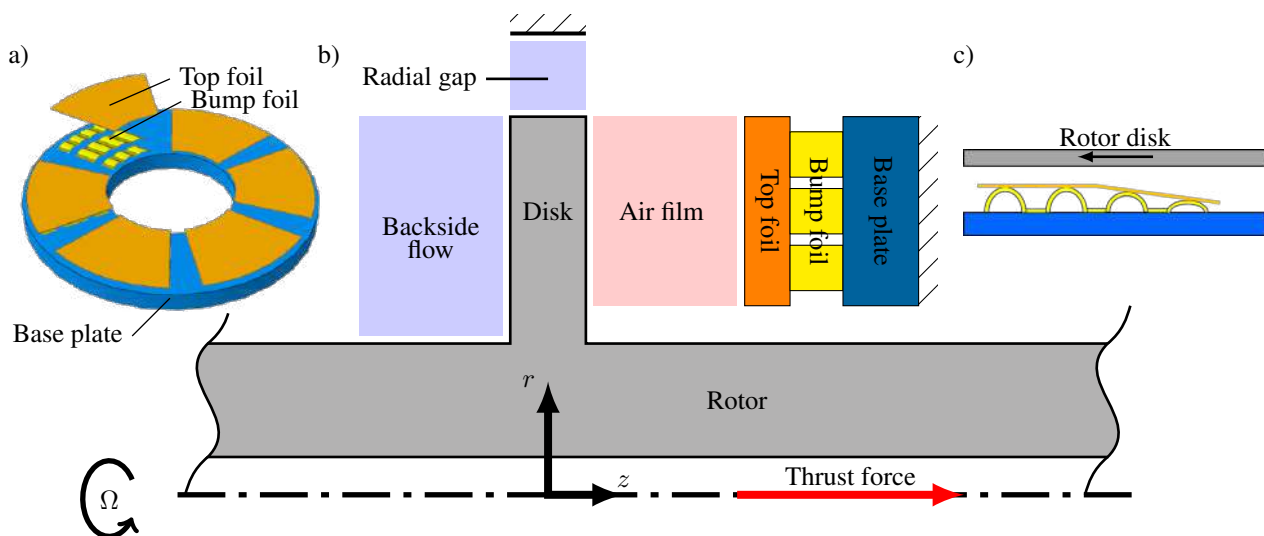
Overview over AFTB components (not to scale). a) Bearing with 6 identical pads, b) section view of bearing in assembly and c) converging gap between top foil (stationary) and rotor disk.
